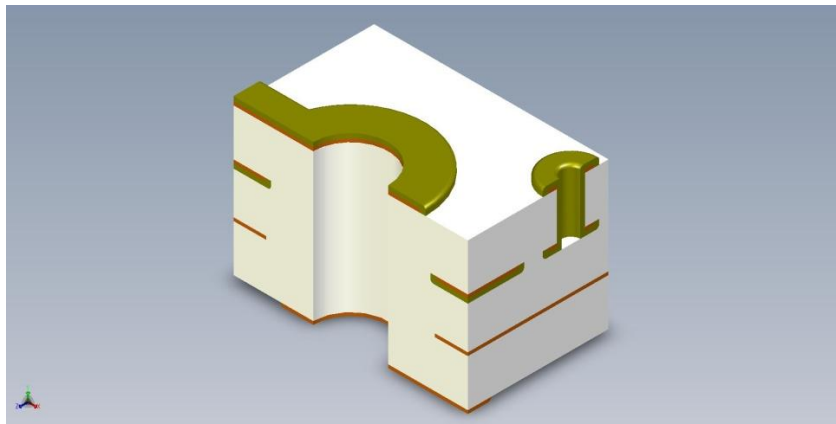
Core from Figure 6 gets laminated to form a four layer assembly and through holes are drilled
